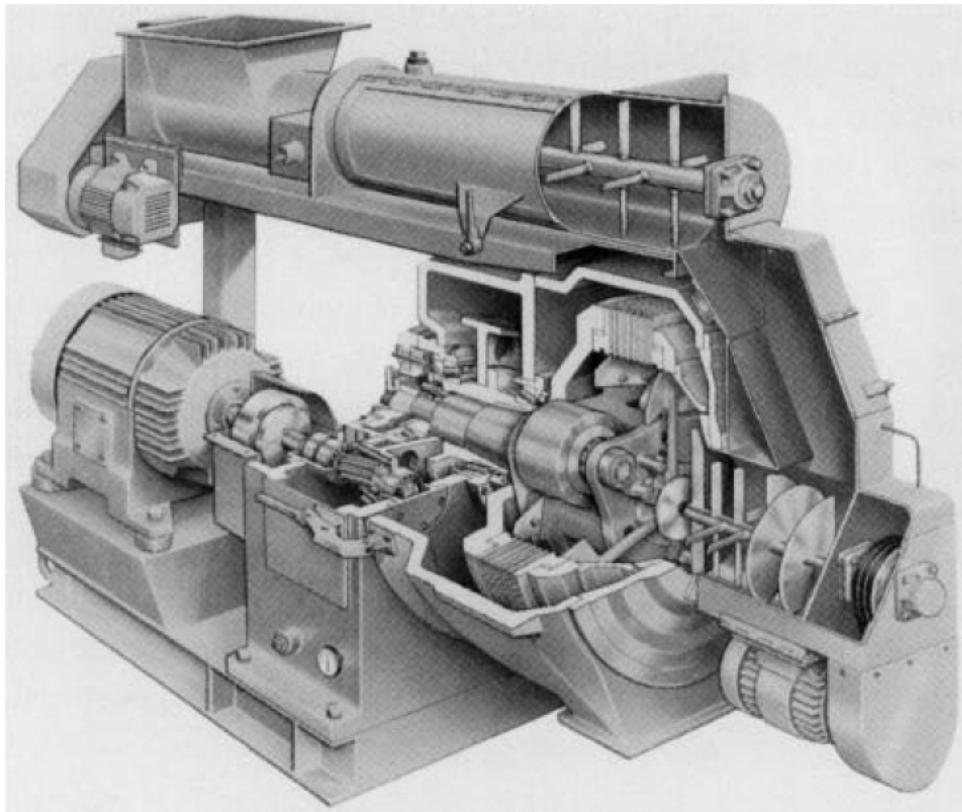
Partial cut through a directly gear driven ring die pellet mill
